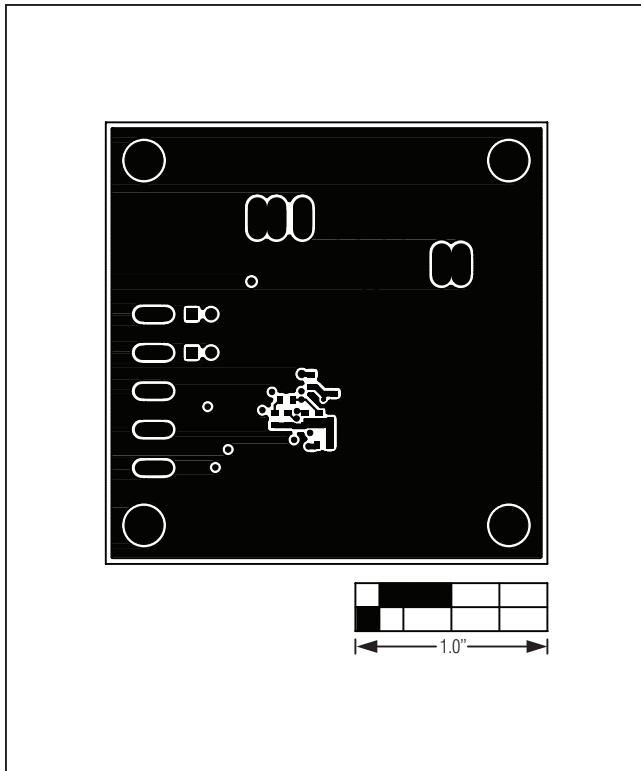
MAX15108 EV Kit PCB Layout—Solder Side
